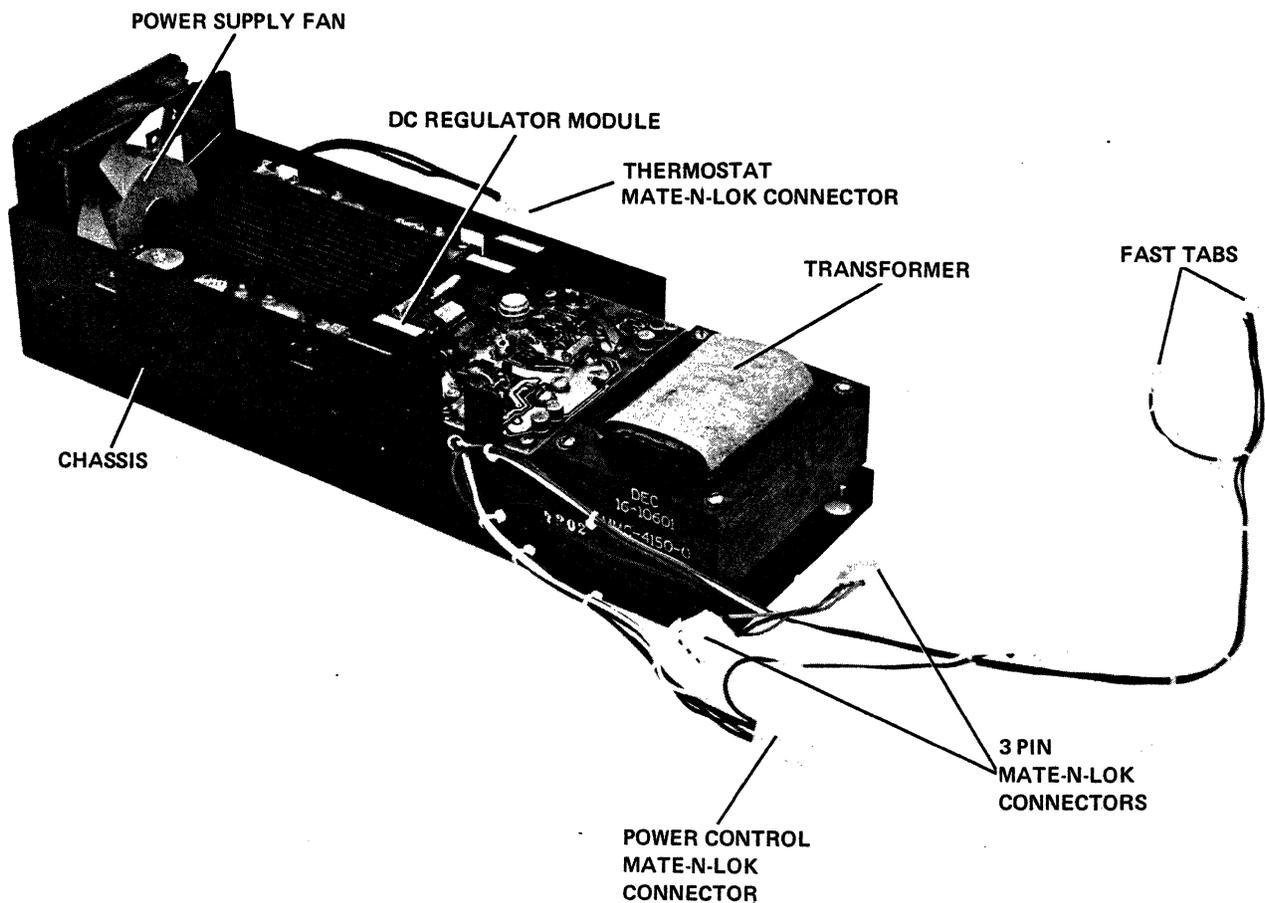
Power Supply Assembly With DC Regulator Module Installed
